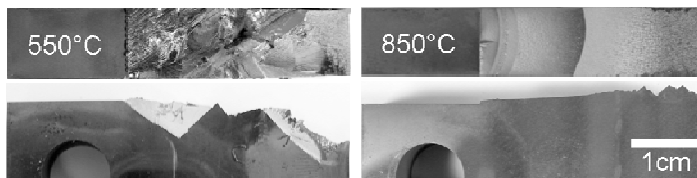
Fractography of fatigue crack growth specimens tested 550°C (left) and 850°C (right). Top- view parallel to loading direction. Bottom- profile of crack path.
